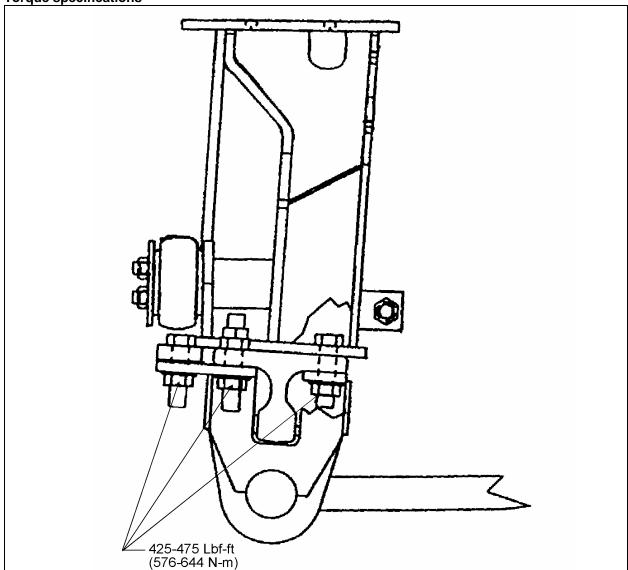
AIR BELLOWS MOUNTING SUPPORT AND AXLE
